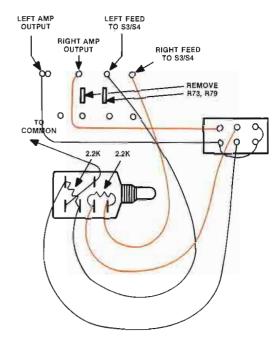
Wiring guide for connecting the pan pot to the PC board and switch.
